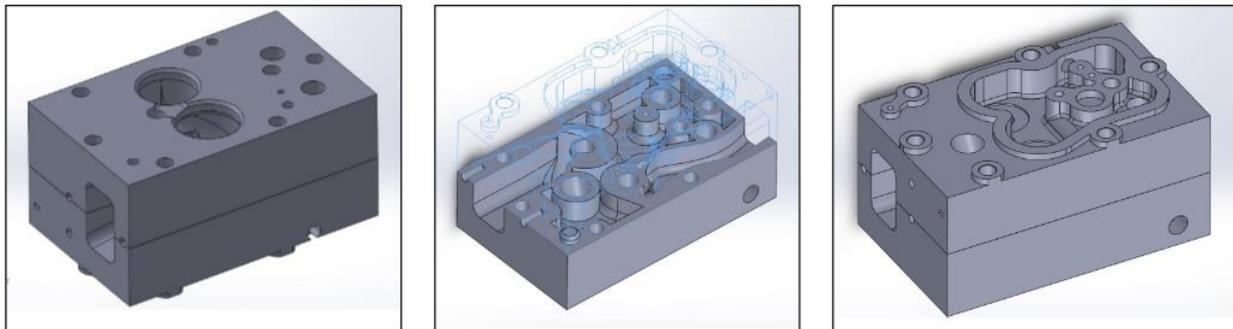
Partial Build of Diesel Engine Valve Block, CAD Drawings
